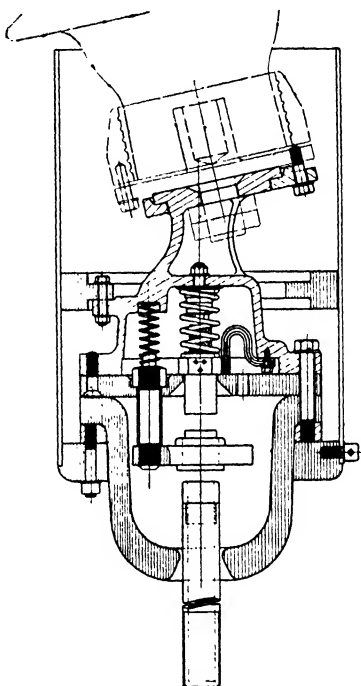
SECTION THROUGH AN OIL-BLAST EXPLOSION-POT CONTACT
